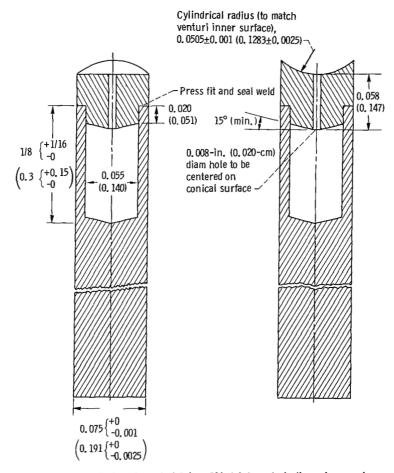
Throat cavity insert. Material, type-316 stainless steel; dimensions are in inches (cm).
